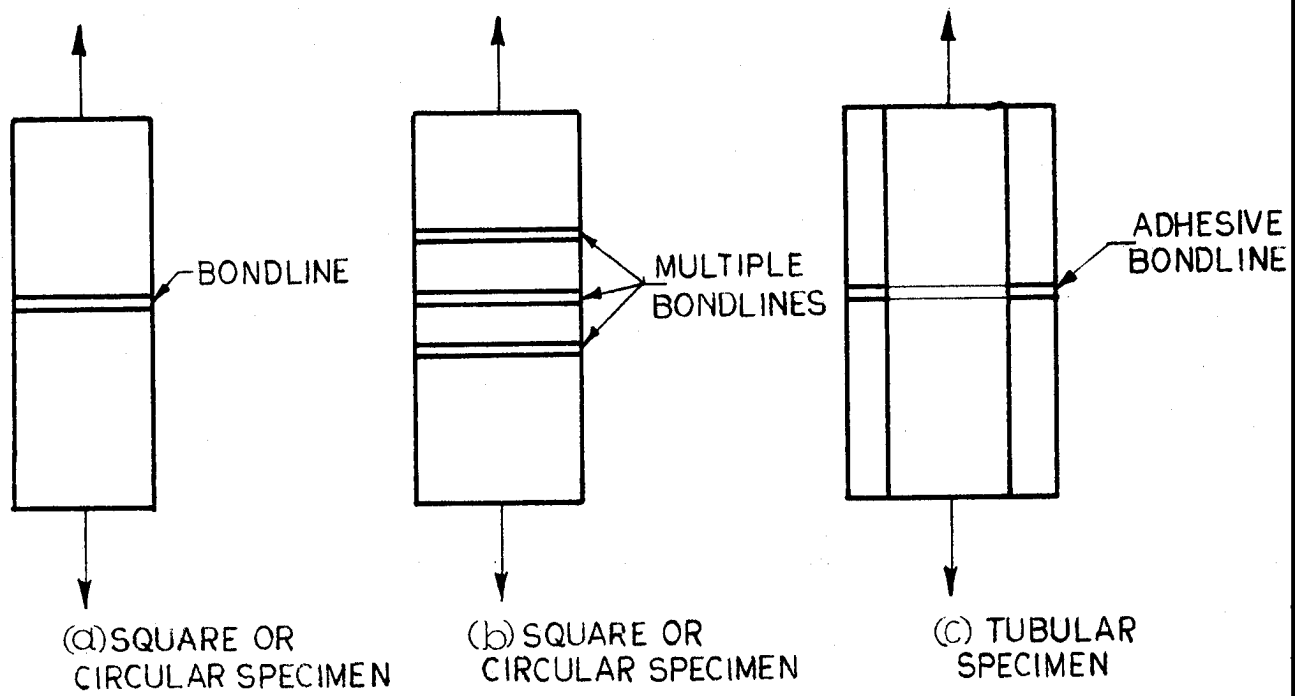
ALTERNATE ADHESIVE BUTT JOINT SPECIMENS
